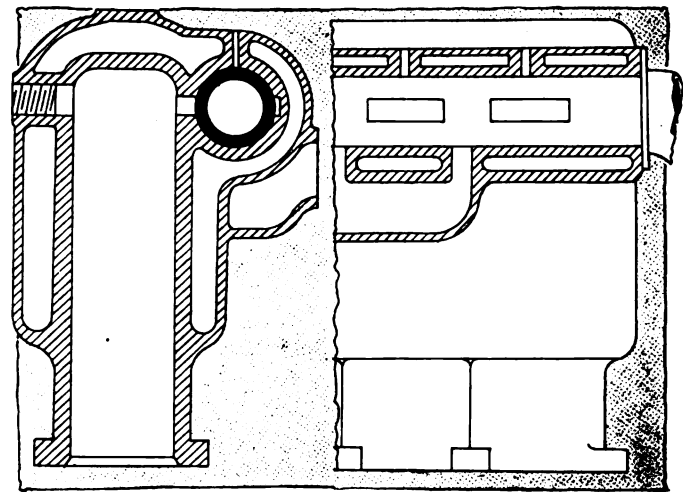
Sectional views of Von Bottweiler motor, showing rotary-valve arranged alongside of cylinders
